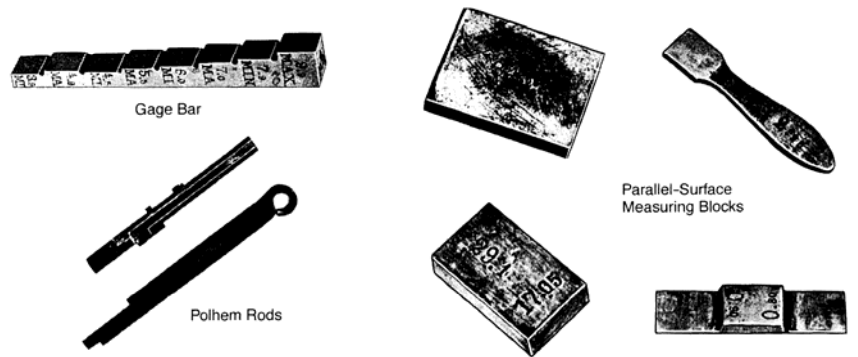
Long before systemized gage block sets were developed, end standards had shown their value in the dimensional control of manufacturing.
